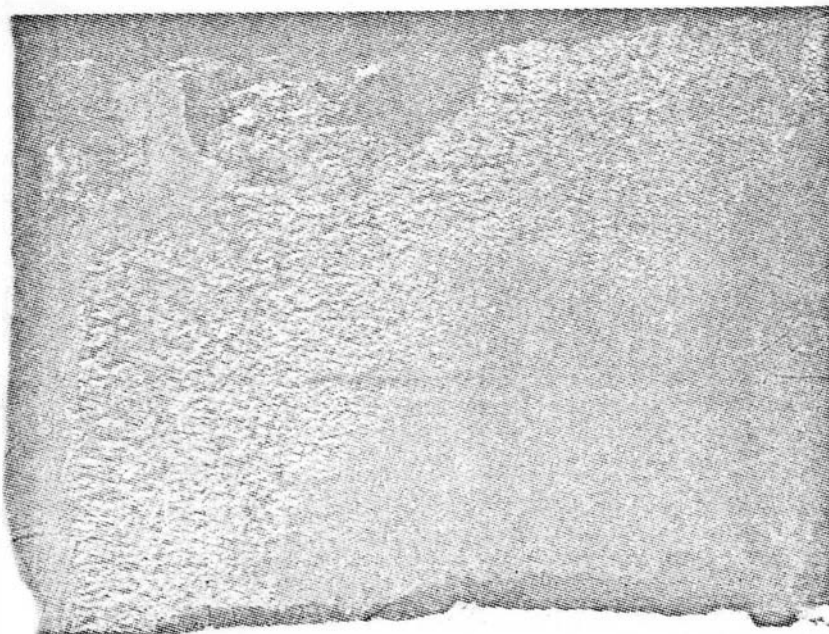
Coolant Side of Shingle. Note the Surface Melting and Coking.
